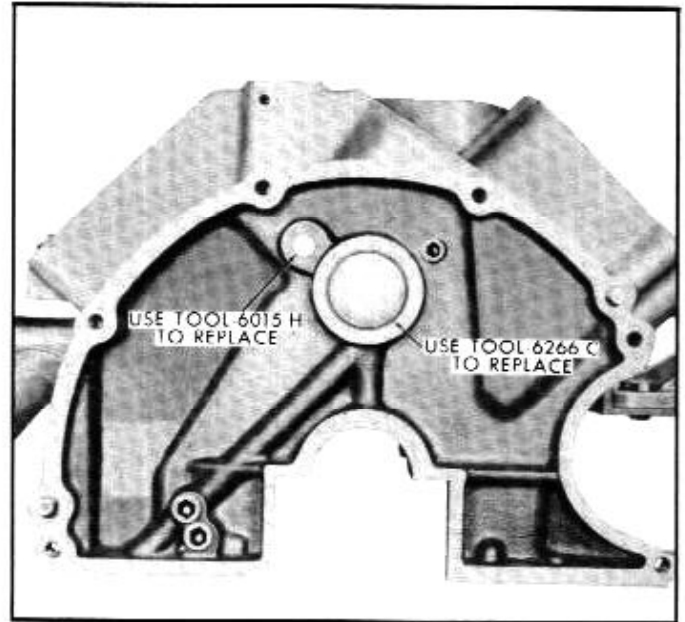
C-99—Location of Cylinder Block Plugs and Fittings
